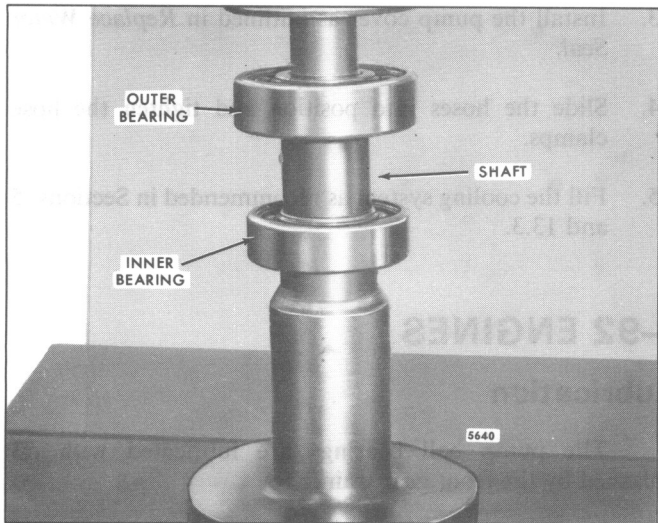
Pressing Bearing on Pump Shaft using Tool J 25257
